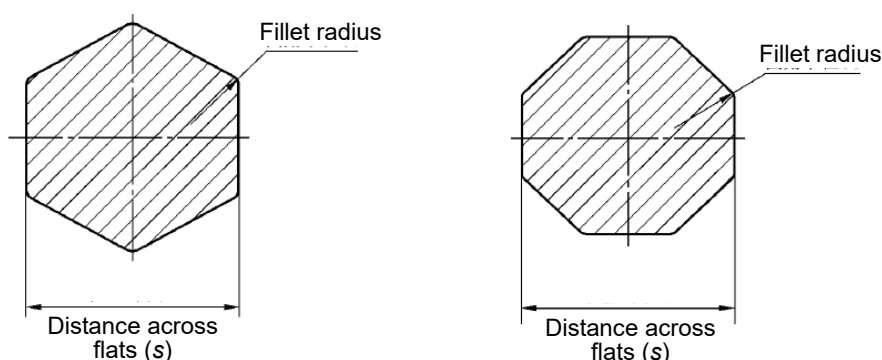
Schematic diagram of cross-section of hot-rolled hexagonal steels and hot-rolled octagonal steels
